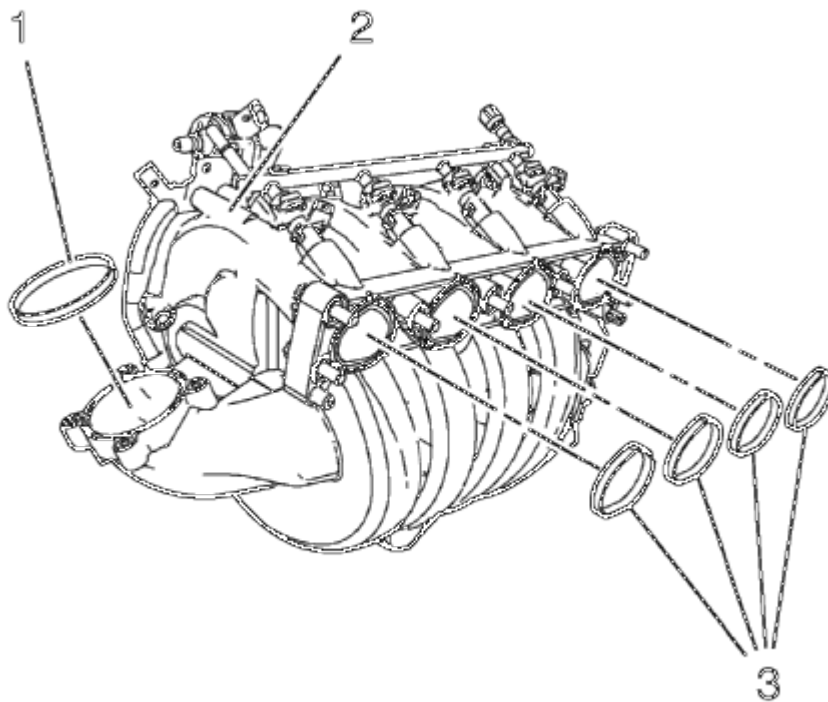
Intake Manifold, Intake Manifold Seal And Throttle Body Seal
